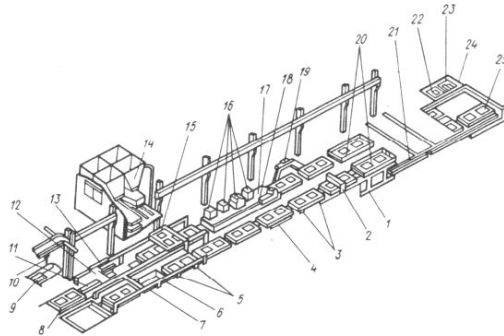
two - branch conveyor line: 1 - forms; 2 - putty machine; 3 - side opening mechanism; 4 - tilter; 5 - side closing mechanism; 6 - trestle; 7 - lower layer mortar; 8 - transfer device; 9 - reinforcement frame; 10 - crane; 11 - pushers; 12 - vibrating platform; 13 - concrete paver; 14 - gallery of concrete mixing unit; 15 - upper layer mortar; 16 - warehouse components; 17 - Forkamera; 18 - guide; 19 - lifting and transport mechanism; 20 - lifts - descenders; 21 - two camera; 22 - transfer device; 23 - drive; 24 - isolated compartment; 25 - trolley
